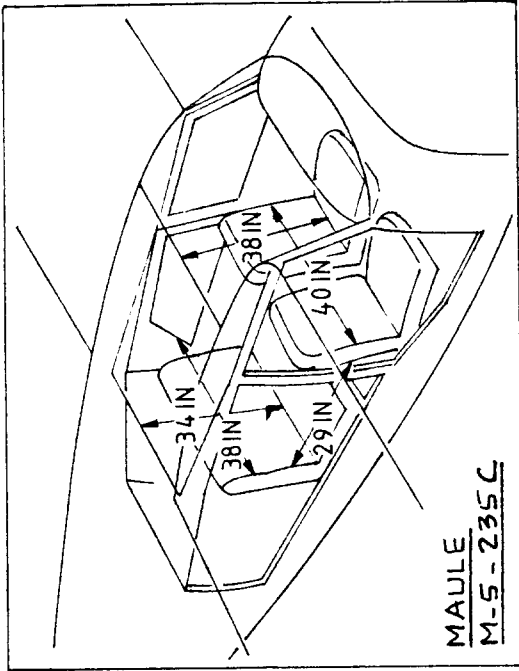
Cabin and Baggage Hold Dimensions for Single Engine Piston/Propeller Driven Airplanes
